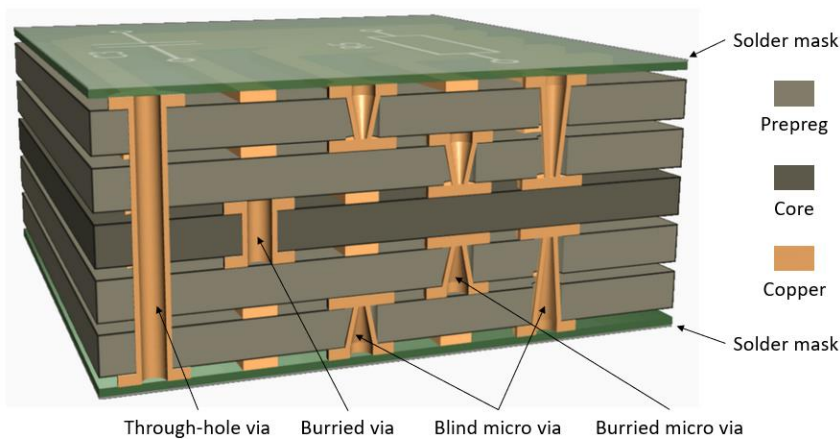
Multi-layer PCB layers and types of vias [3].
